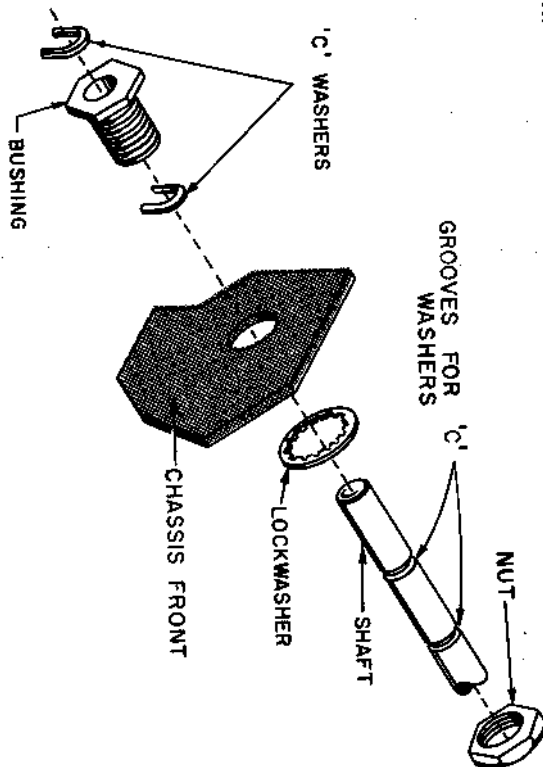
BANDSWITCH SHAFT ASSEMBLY
